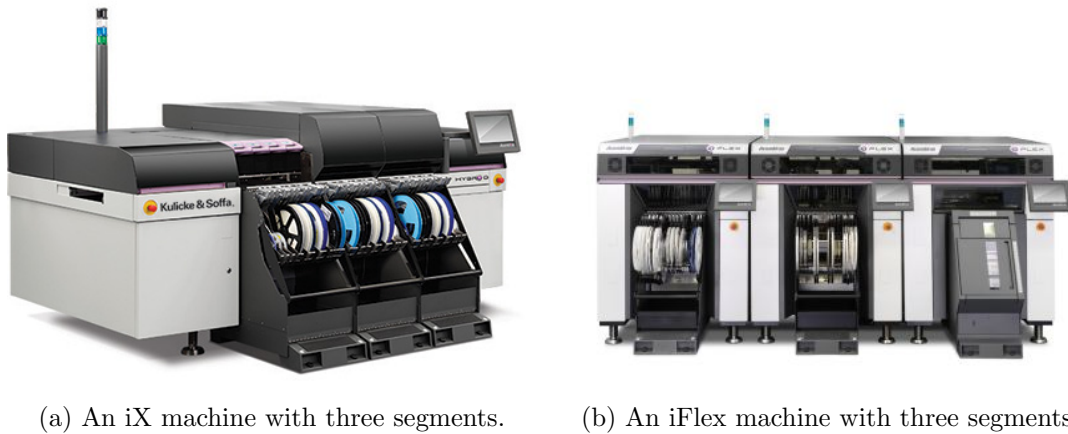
The two types of machines manufactured by K&S to allow picking and placing components in the assembly line.
